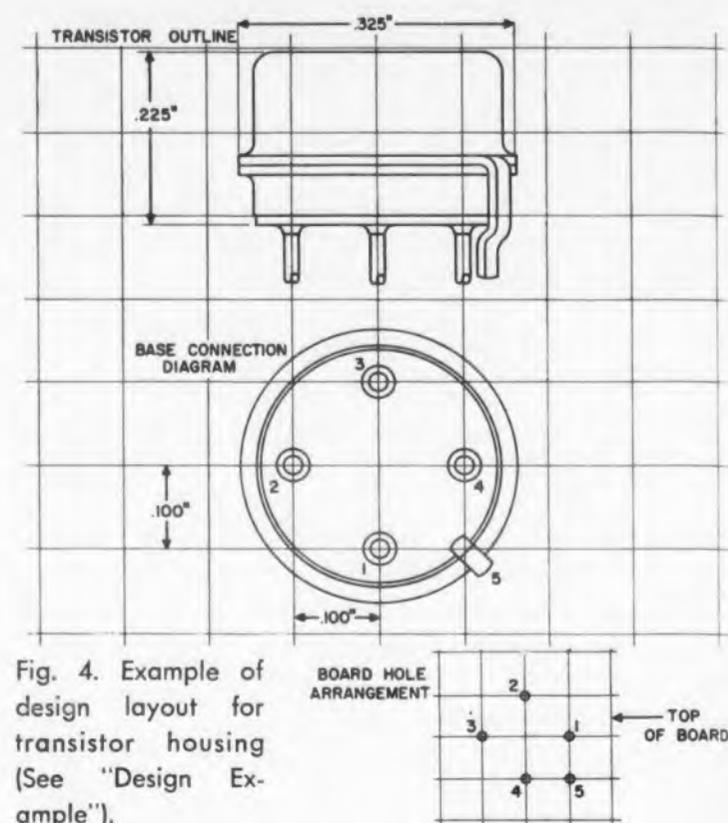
Example of design layout for transistor housing (See "Design Example").
